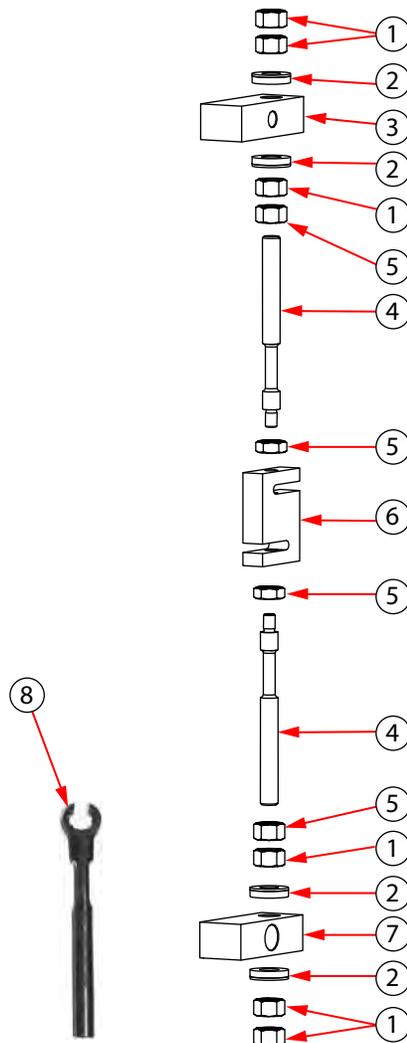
Load Cell Replacement Kit Parts Illustration
